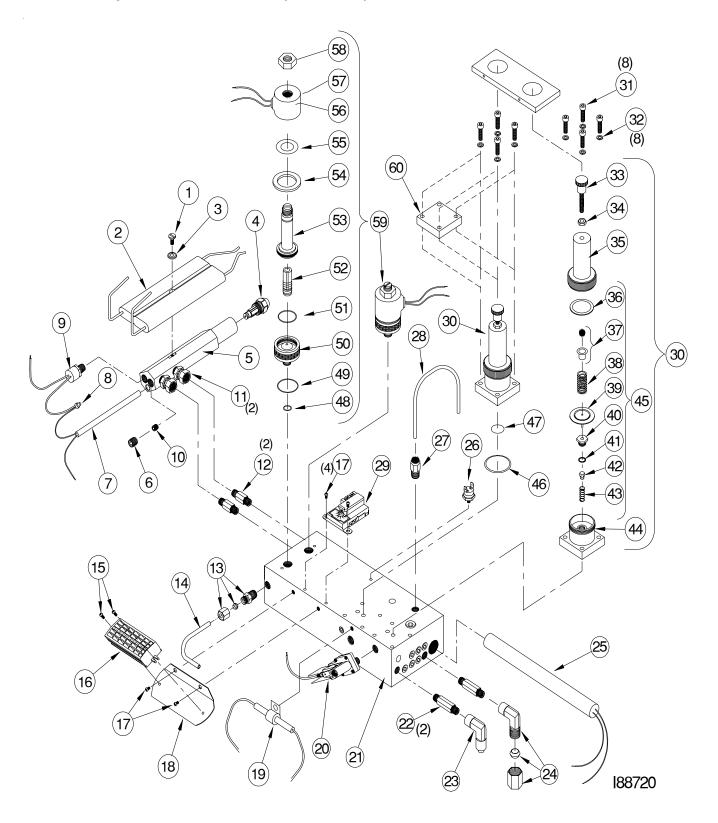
CB-551-CE Preheater Block and Electrode Assembly Component Detail (CB-350-CTB)
